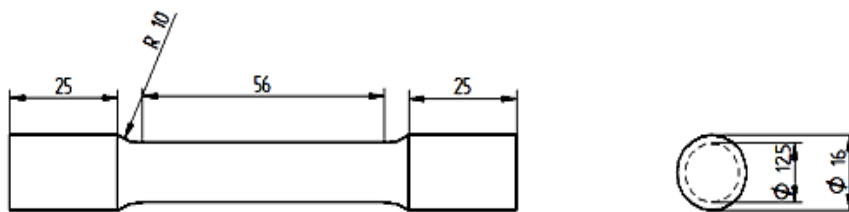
Tensile test specimen prepared following ASTM E8 (All dimensions are in mm)
